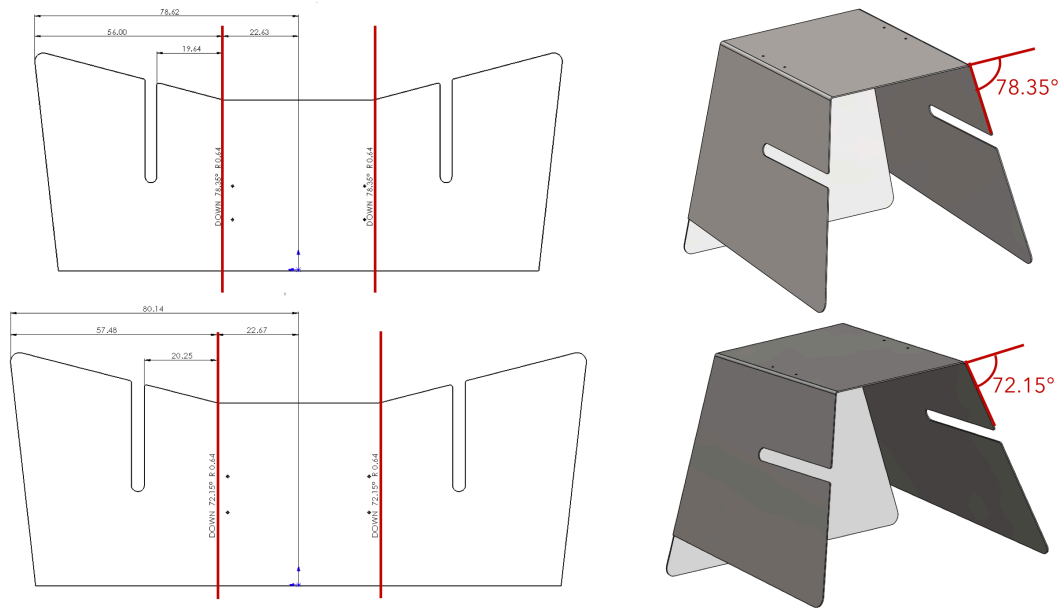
Dimensional drawing and 3D illustration of hospital bed version
